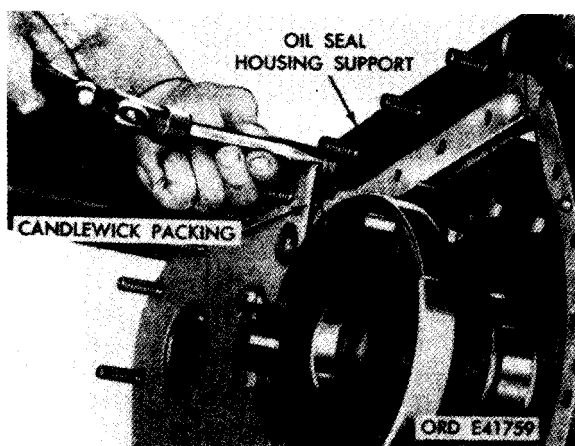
Installing candlewick packing between crankcase and oil seal housing support.
